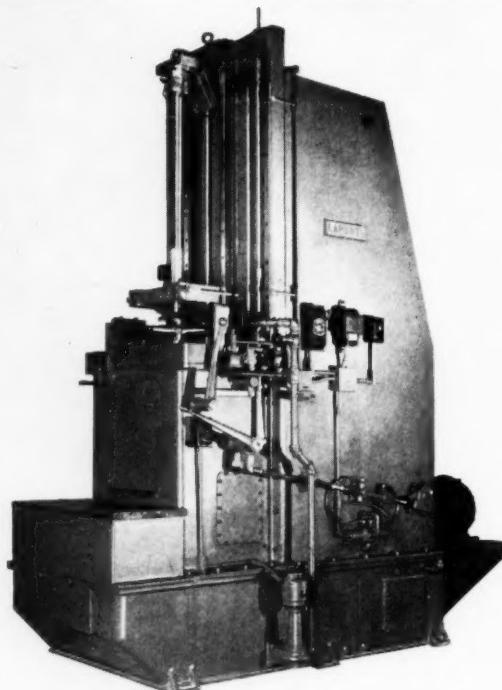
Lapointe 50-ton Pulldown Broaching Machine
